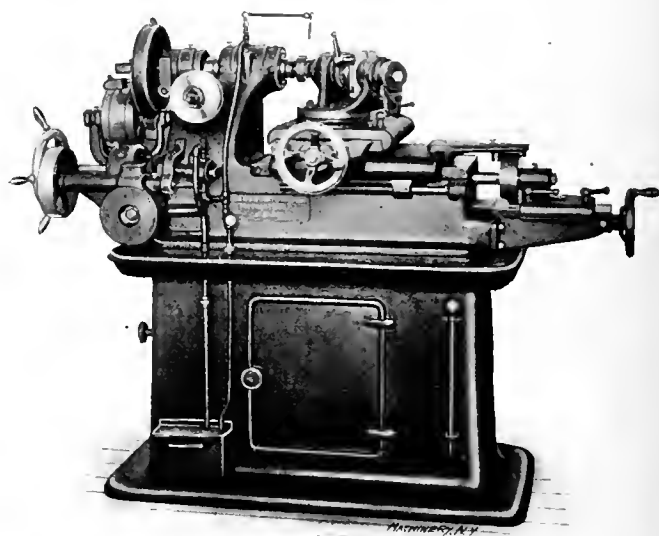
Brown & Sharpe Machine for Correcting Bevel Gears by the Molding-Generating Principle, employing the Impression Process.
